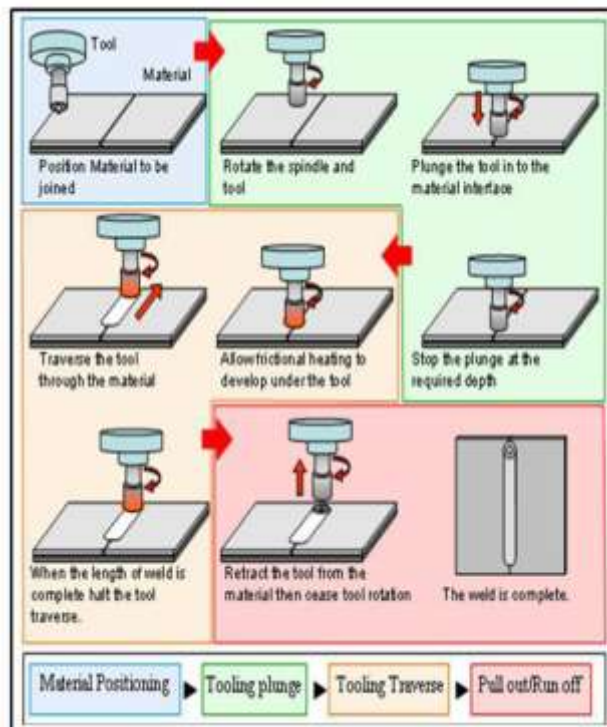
Process Diagram of Friction stir welding [3]
